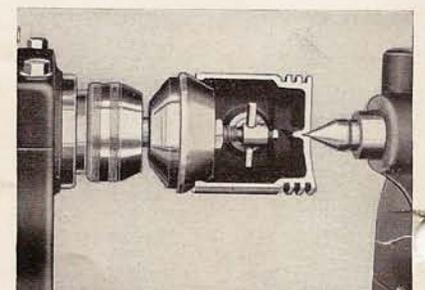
Cross Section View showing Application of the Piston Adapter.
